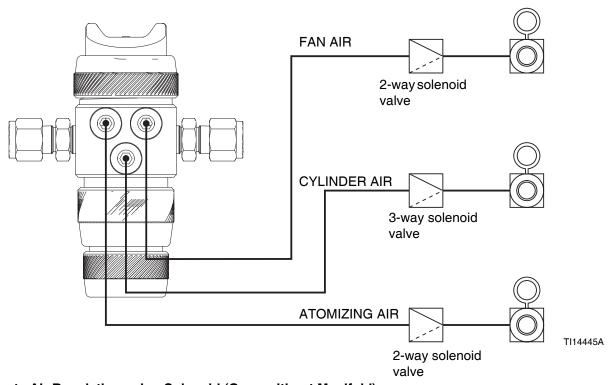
Remote Air Regulation using Solenoid (Guns without Manifold)
